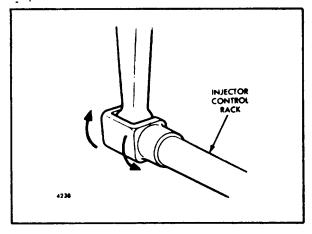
Checking Rotating Movement of Injector Control Rack
